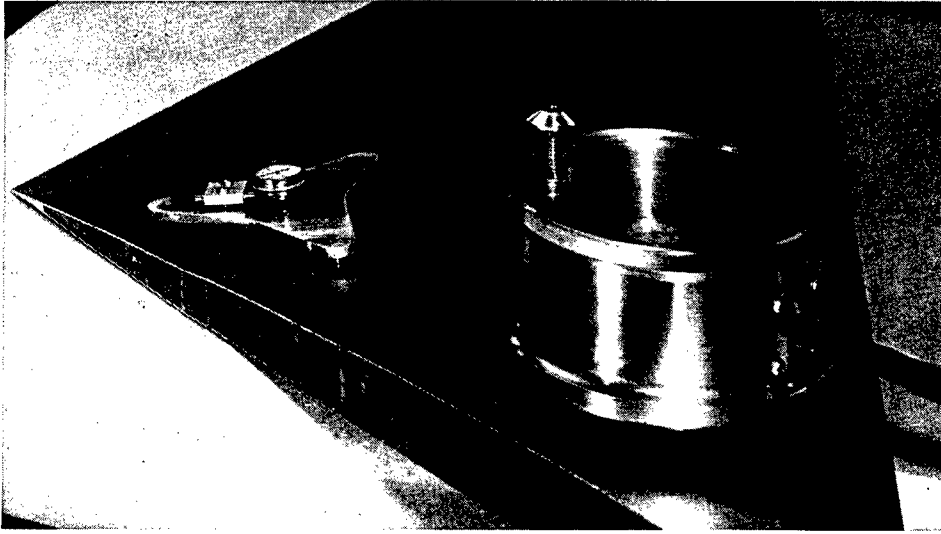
Vacuum bond-testing device for use on slightly curved sandwich parts.
